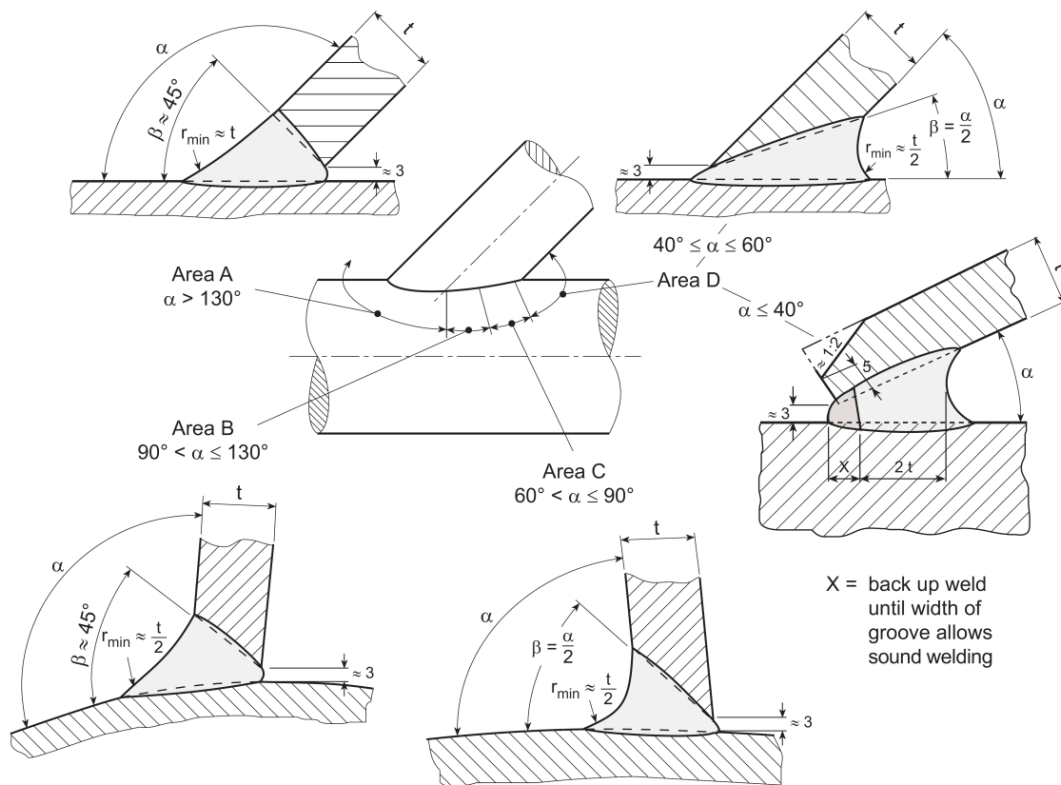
Typical tubular weld connections without back welding
